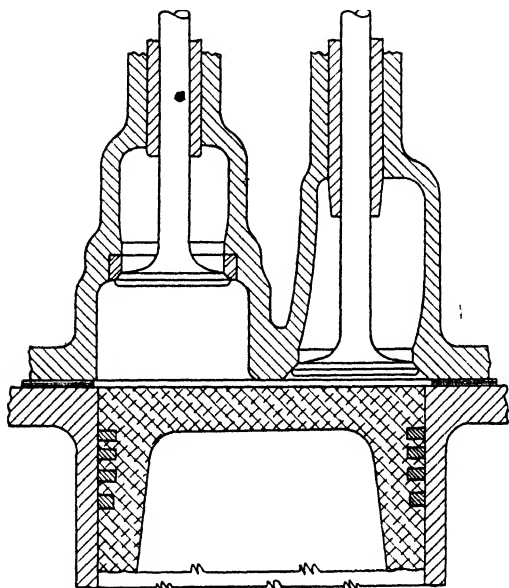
ANOTHER VIEW OF THE LANOVA SINGLE-LOBE COMBUSTION HEAD.
